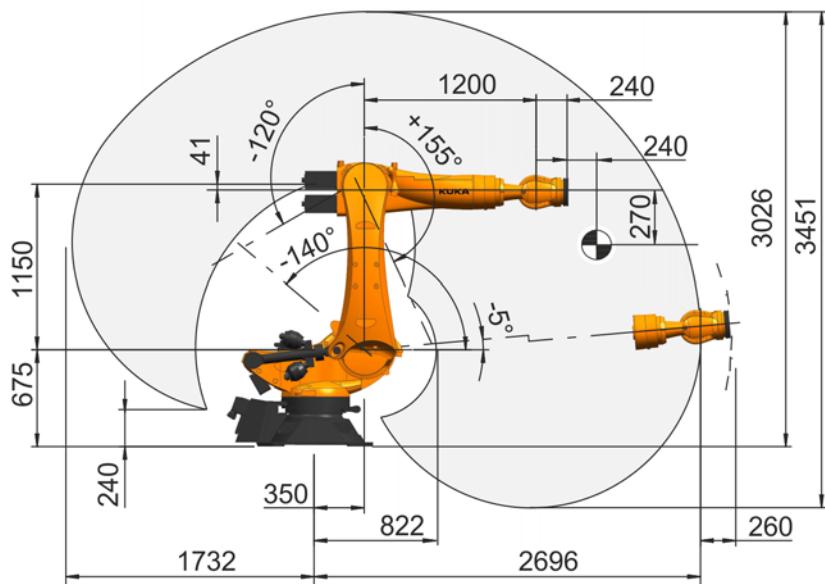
KR 210 R2700 prime, working envelope, side view
